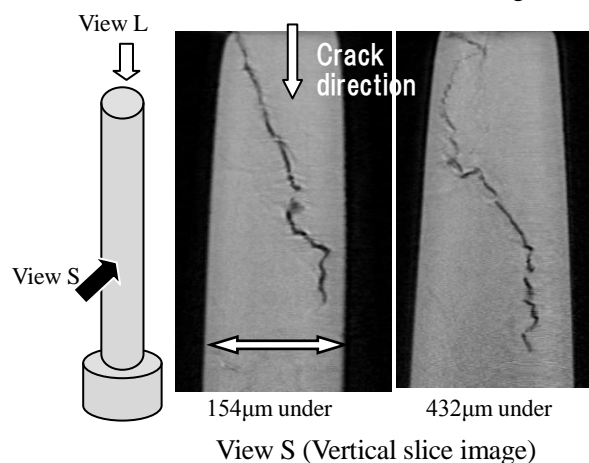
Appearance of measurement sample (NCF600 weld metal)
